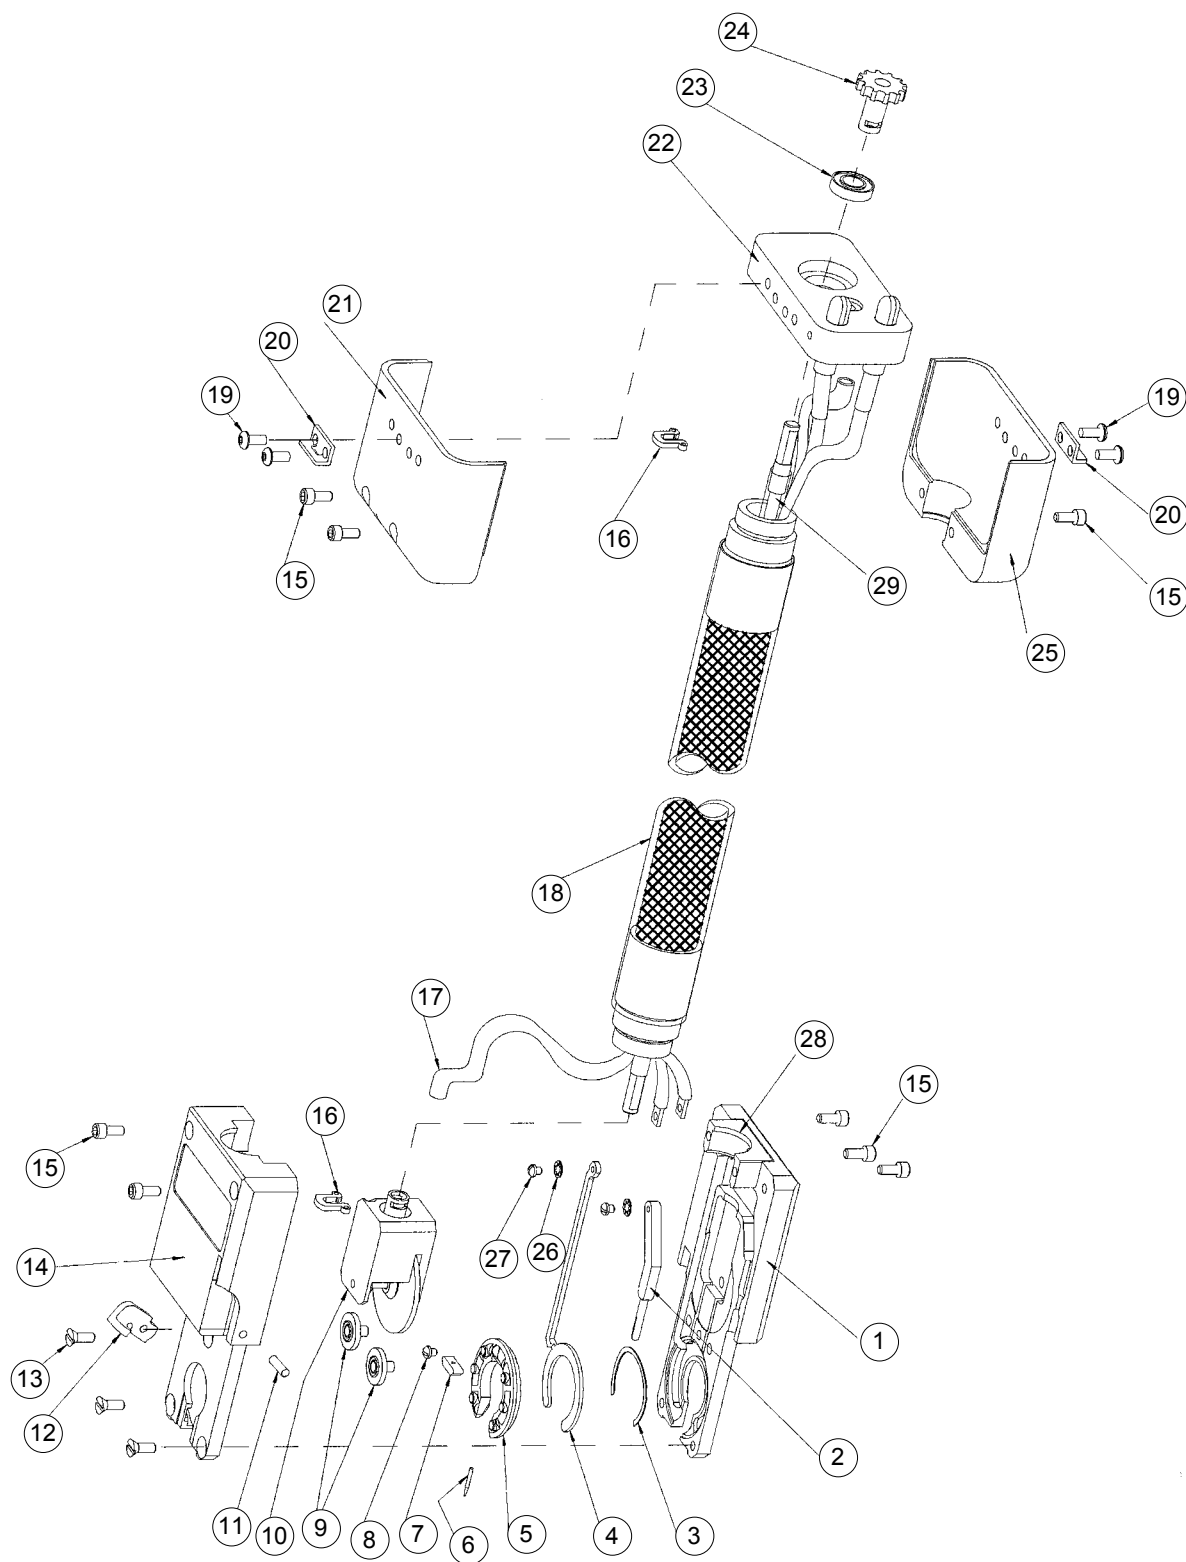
SWS-4MFH-B Flexible Weld Head
